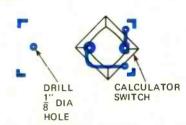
CALCULATOR SWITCH positioned on the PC board. See photo on this page.
